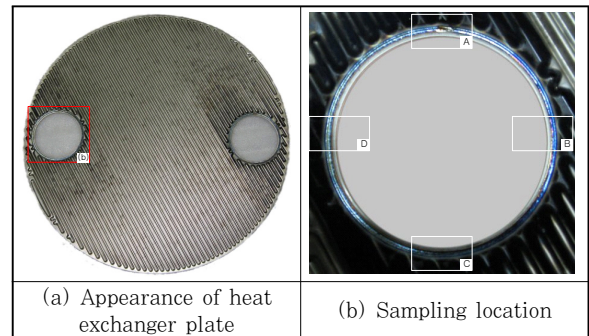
Sampling location and method of lap weldment for heat exchanger plate
